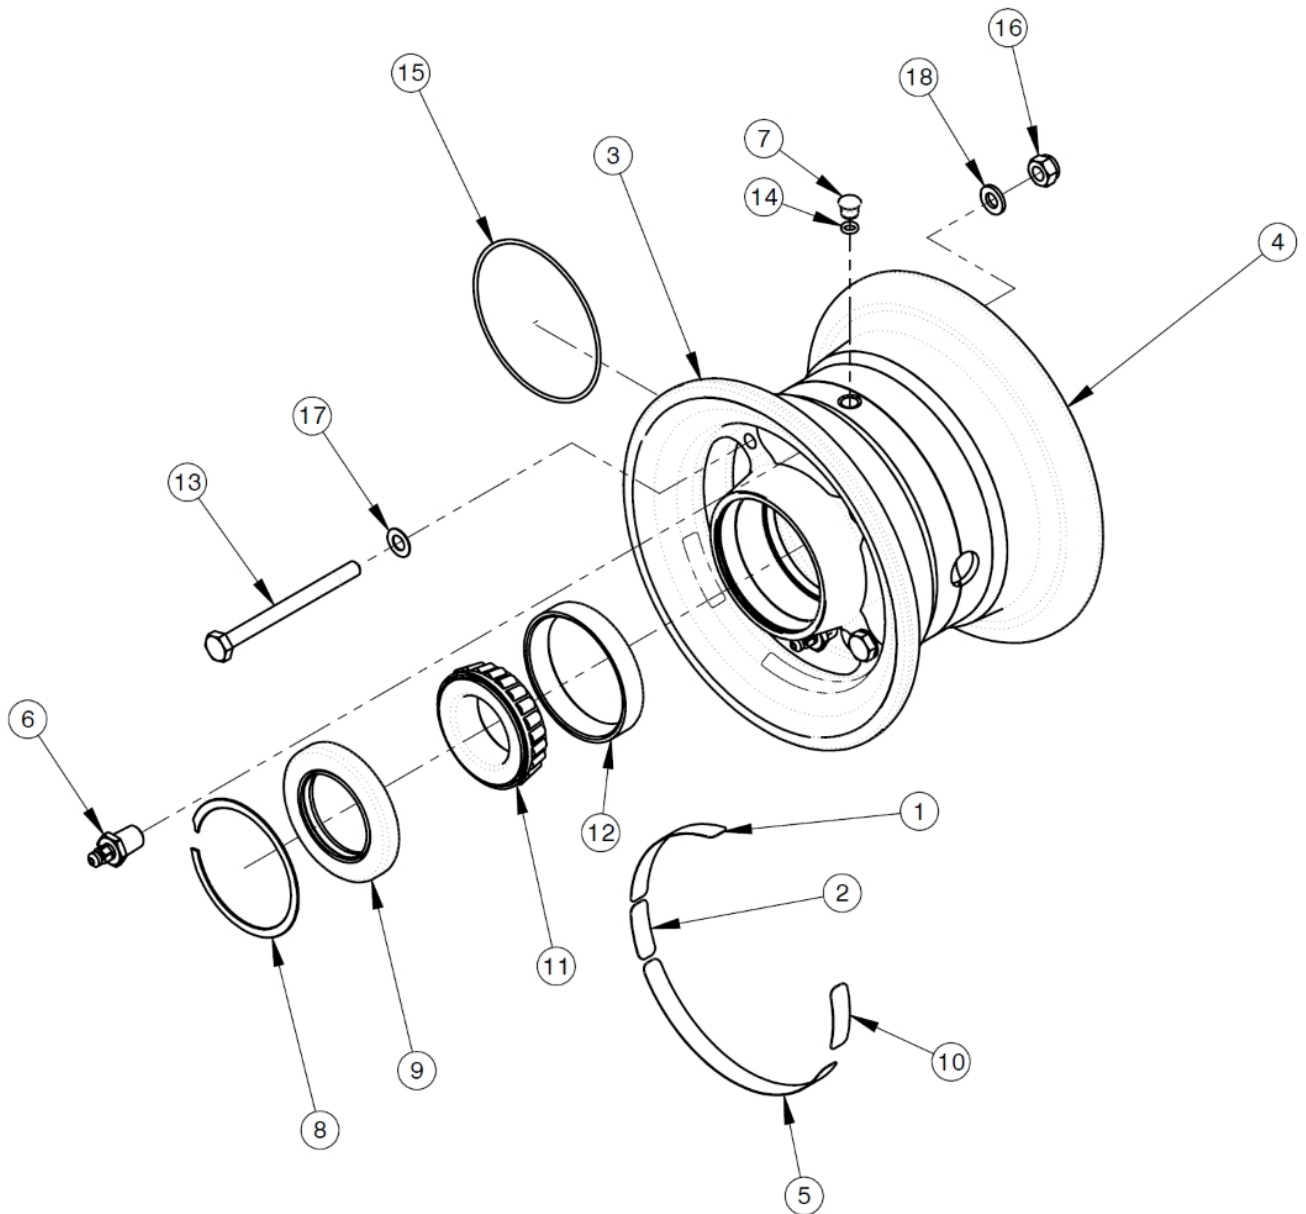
e 5.00-5, 65-42170 Nose Wheel Assembly, Oil Bath Type
